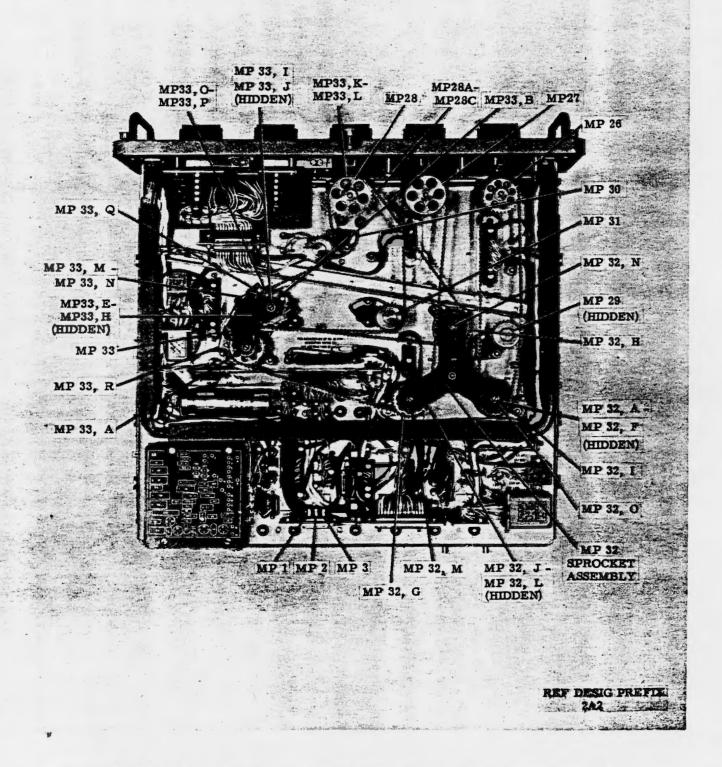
Radio Transmitter T-827/URT, Bottom View, Component and Test Point Location (Sheet 2 of 2)
